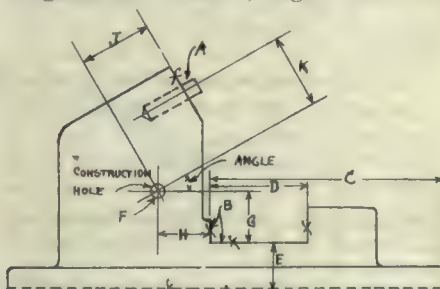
EXAMPLE OF MEASURING ANGULAR SURFACE AND LOCATING PIN "A."
